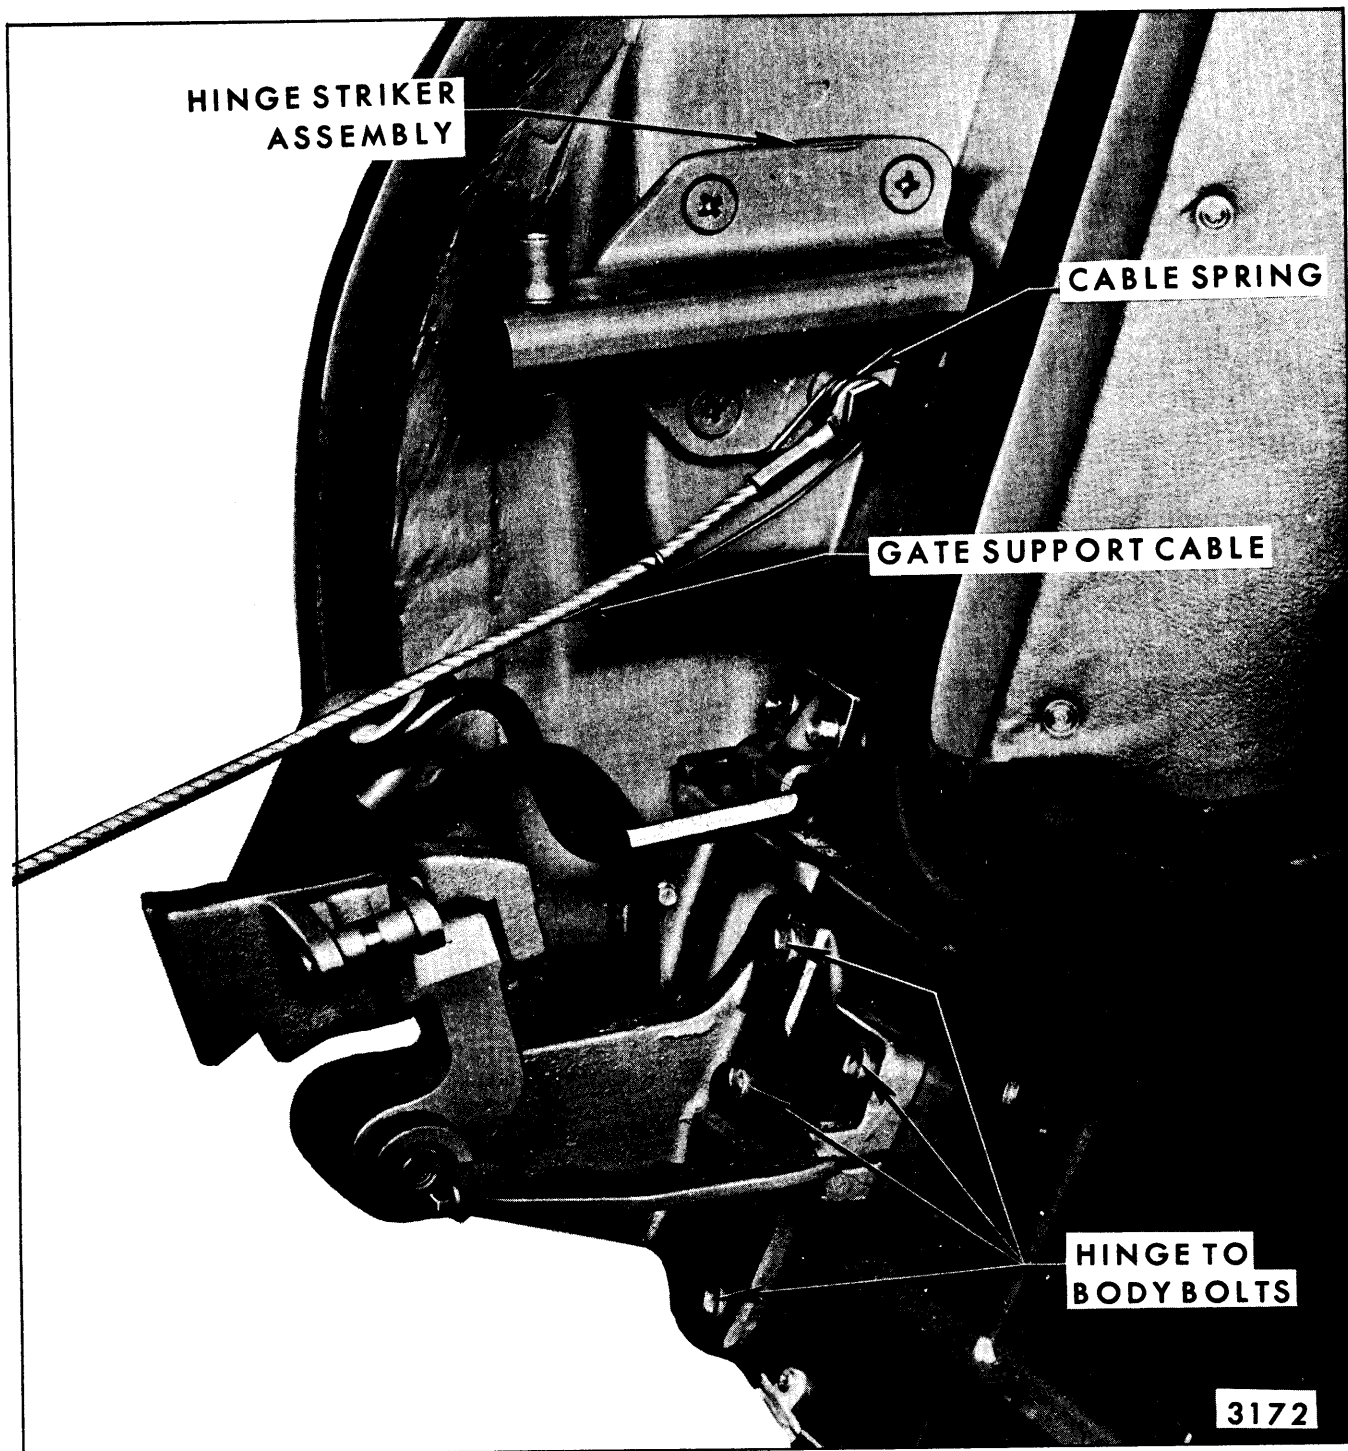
Tail Gate Adjustments - "B" Body Shown - "A" Body Typical
